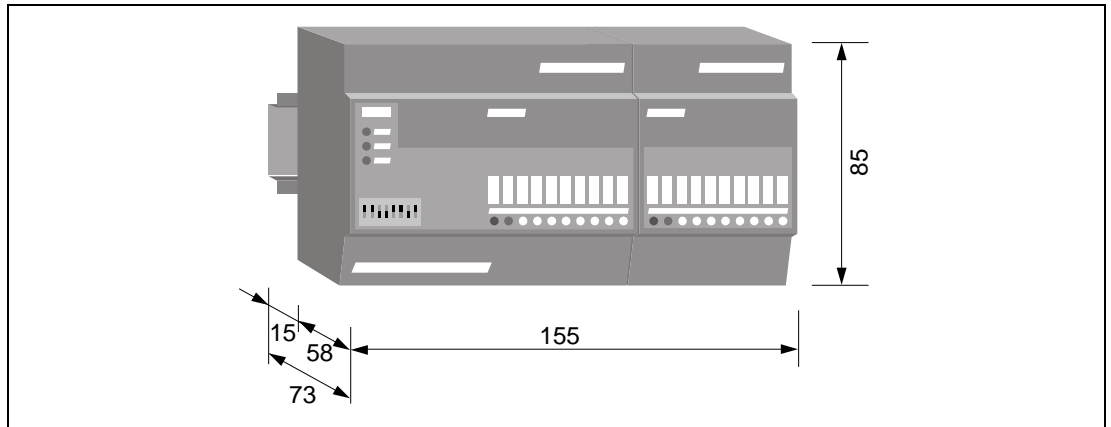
Dimensions DDC 71x/-T/-TH
